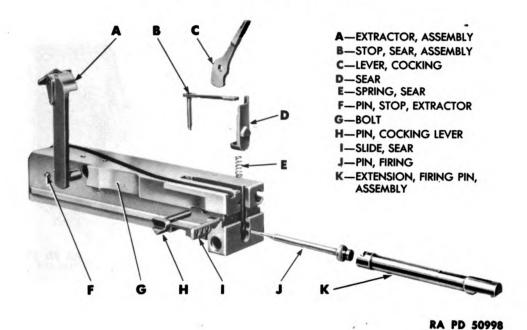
M1921 And M1921A1 Bolt Group-Exploded View
